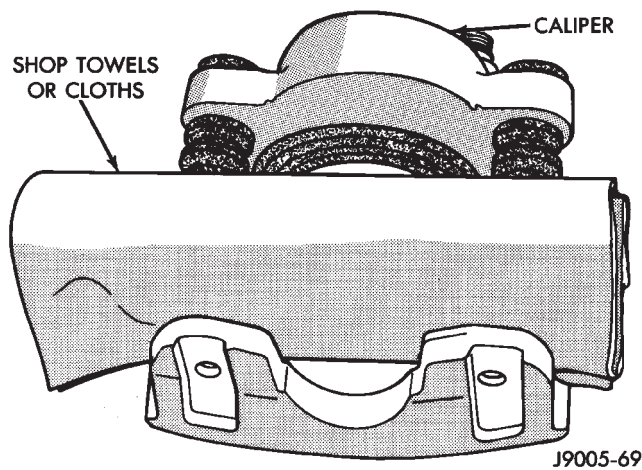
Padding Caliper Interior To Protect Piston During Removal
